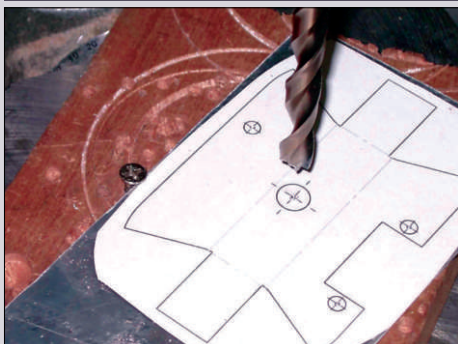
Drilling the holes using a hand drill. Notice the screw used to limit work piece rotation while drilling.
